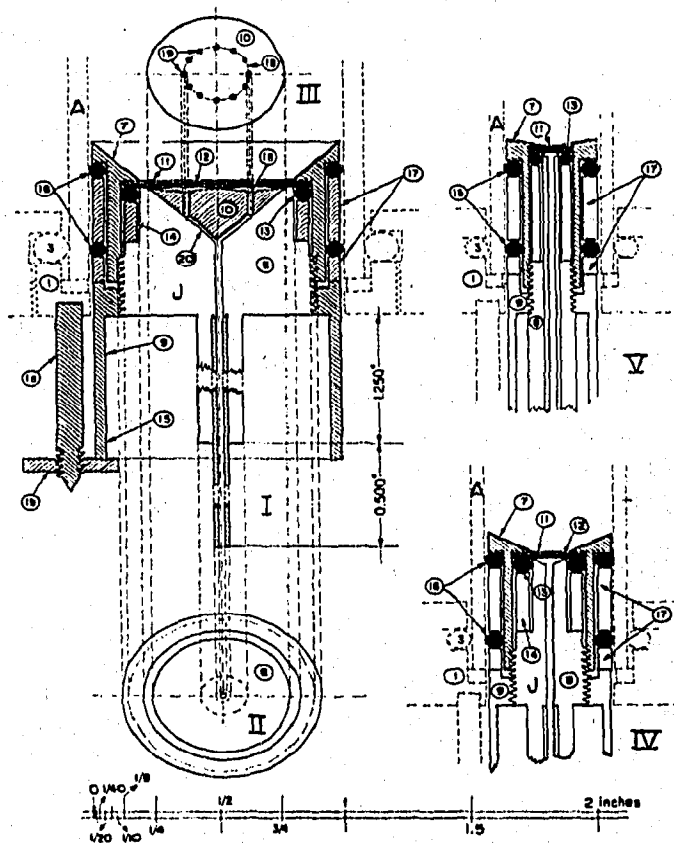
Axial sections of bottom fittings for the 1 (I), 1/2 (IV) and 3/8 in. (V) columns. Bottom view of 1 in. fitting shown in (II); top view of perforated cone 10 shown in (III).
